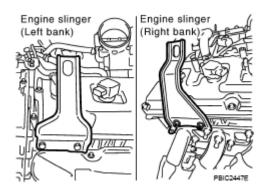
Identifying Engine Slingers Into Front Of Cylinder Head (Left/Right Bank) Courtesy of NISSAN MOTOR CO., U.S.A.
